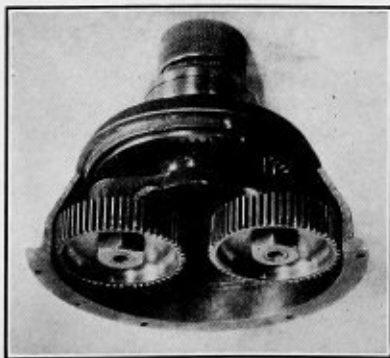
COMPOUND GEARING IN THE HAESLAR DRILL.
